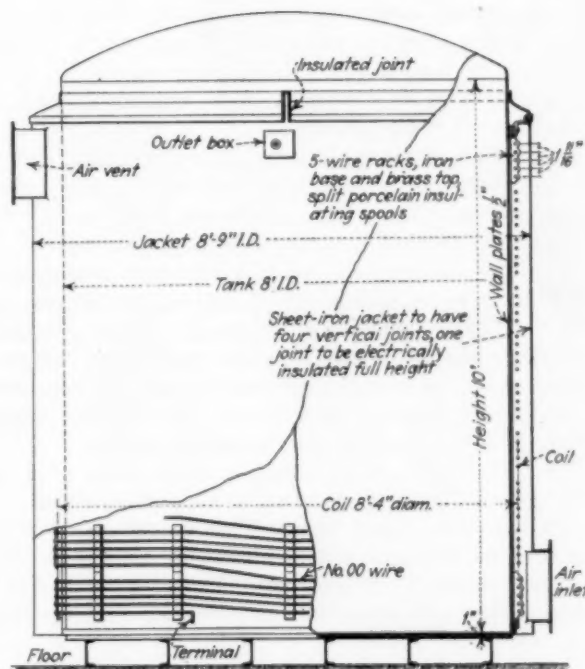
Induction coil used to hold dehydrated caustic molten in a welded-steel storage tank
